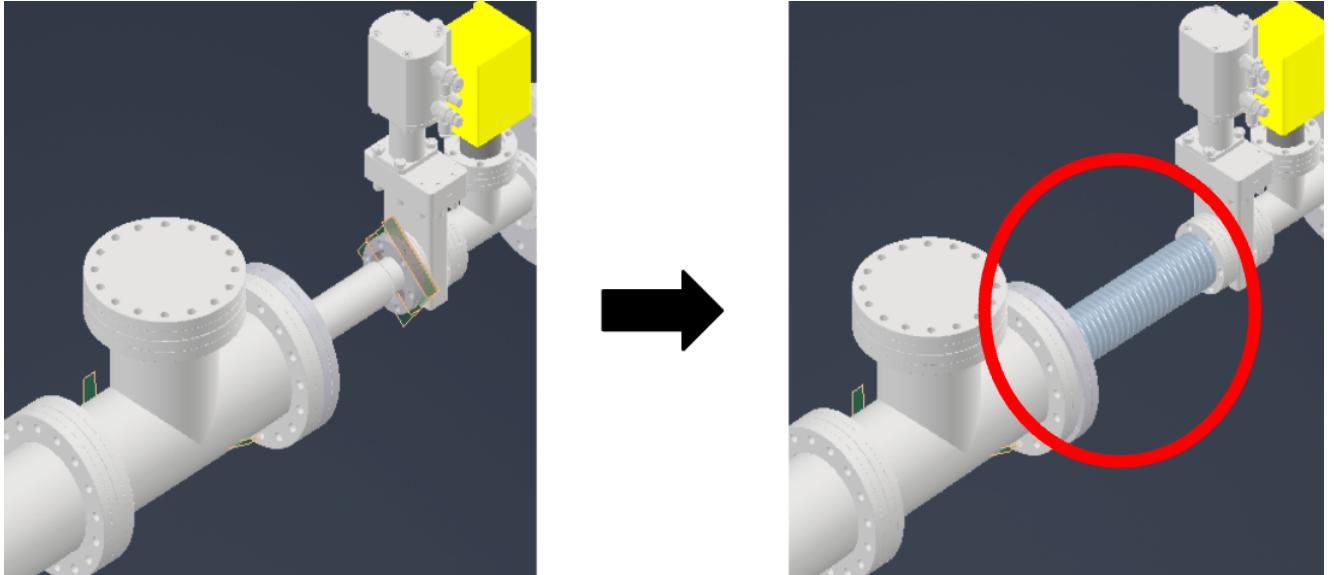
CAD assembly showing added flexible bellows sections. The left side is the old version, and the right side is the new version. The red circle indicates the changed area.
